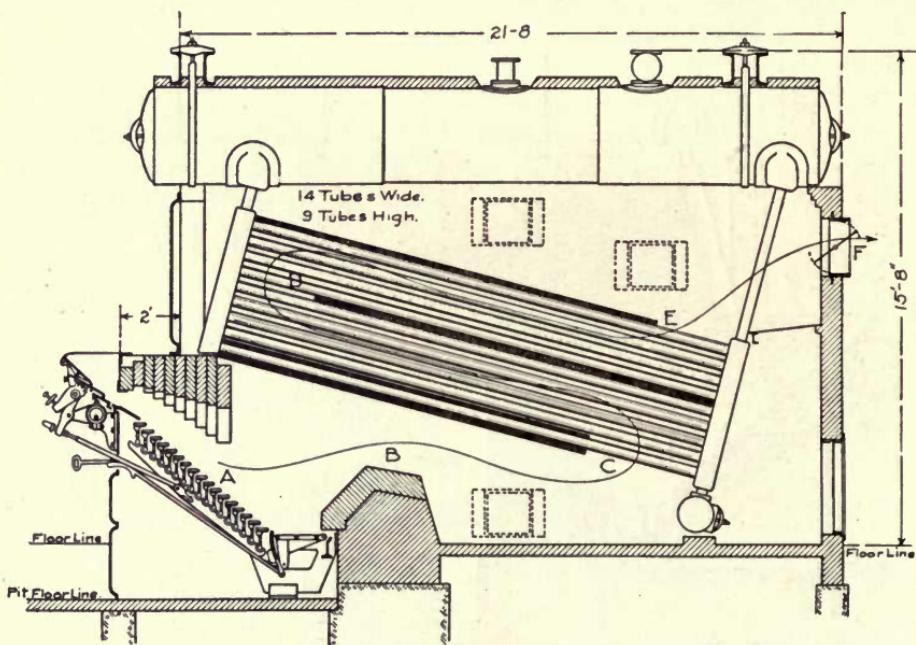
BABCOCK & WILCOX 220 H. P. BOILER EQUIPPED WITH RONEY STOKER
